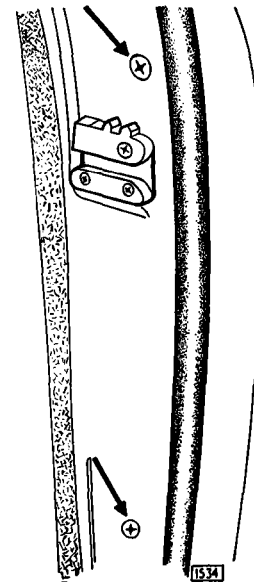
Showing the two screws which secure the rear door hinge at the front of the centre pillar.
